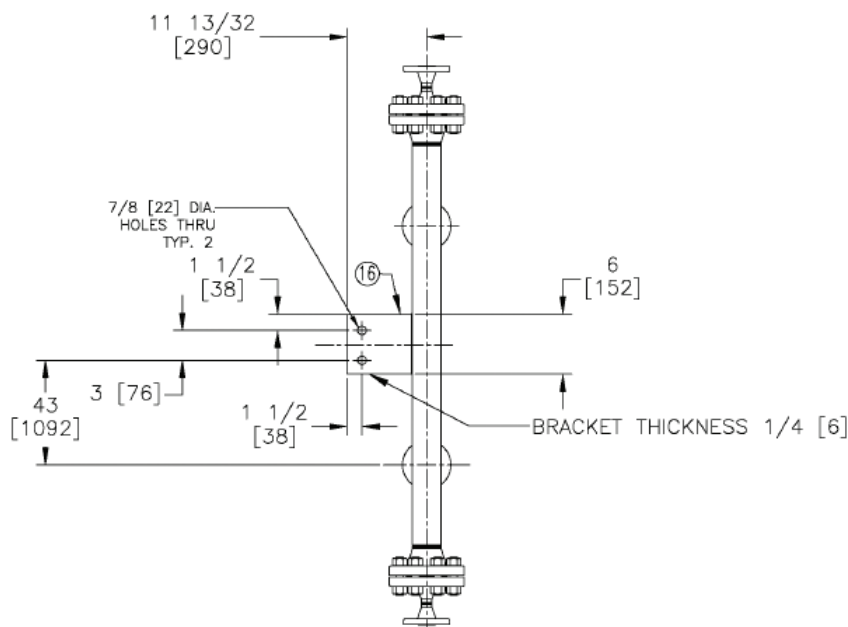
Support plate welded on a gauge chamber, in mm.
